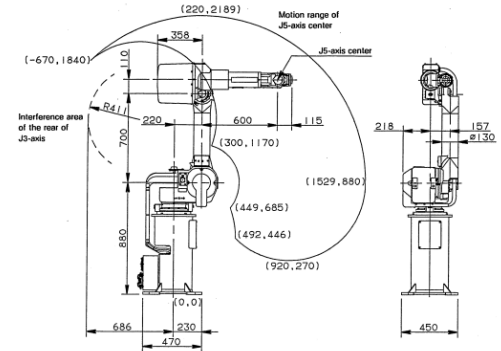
(a) External dimensions mechanical unit (ARC Mate Sr./S-10 floor mount type)
